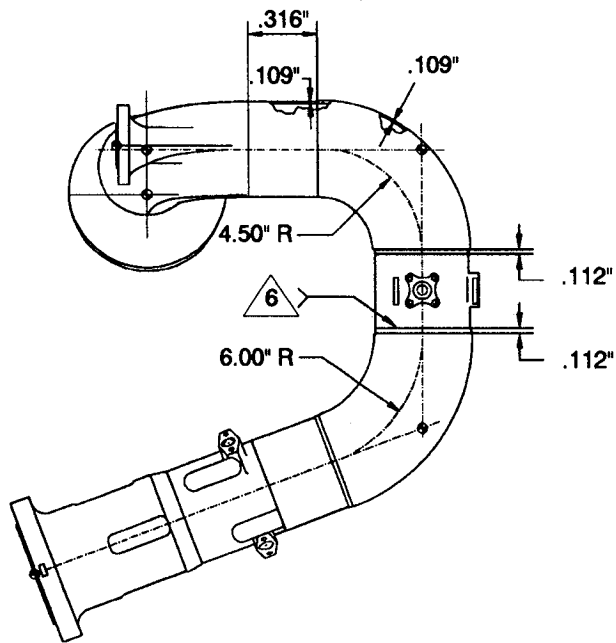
Detail of HPOTP Main Discharge Duct Near Weld 6
